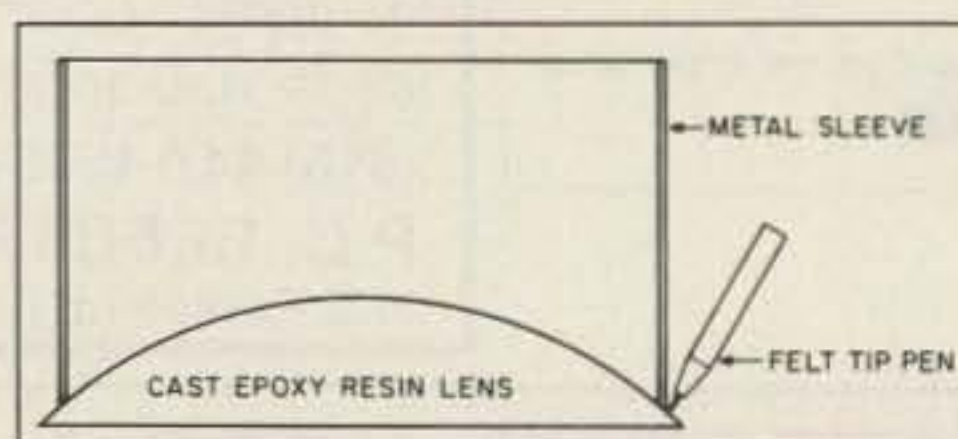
Marking the cast lens for edging. Note that the marking sleeve or cylinder must be perpendicular to this rear surface of the lens.
